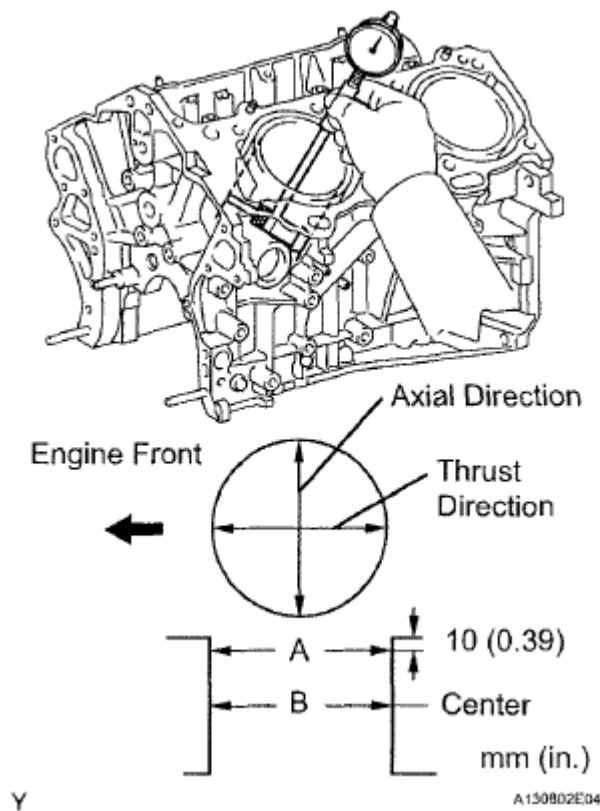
Measuring Cylinder Bore Diameter Positions A And B
